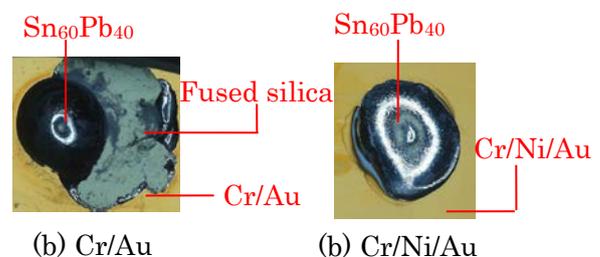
Solder on Cr/Ni/Au and Cr/Au
